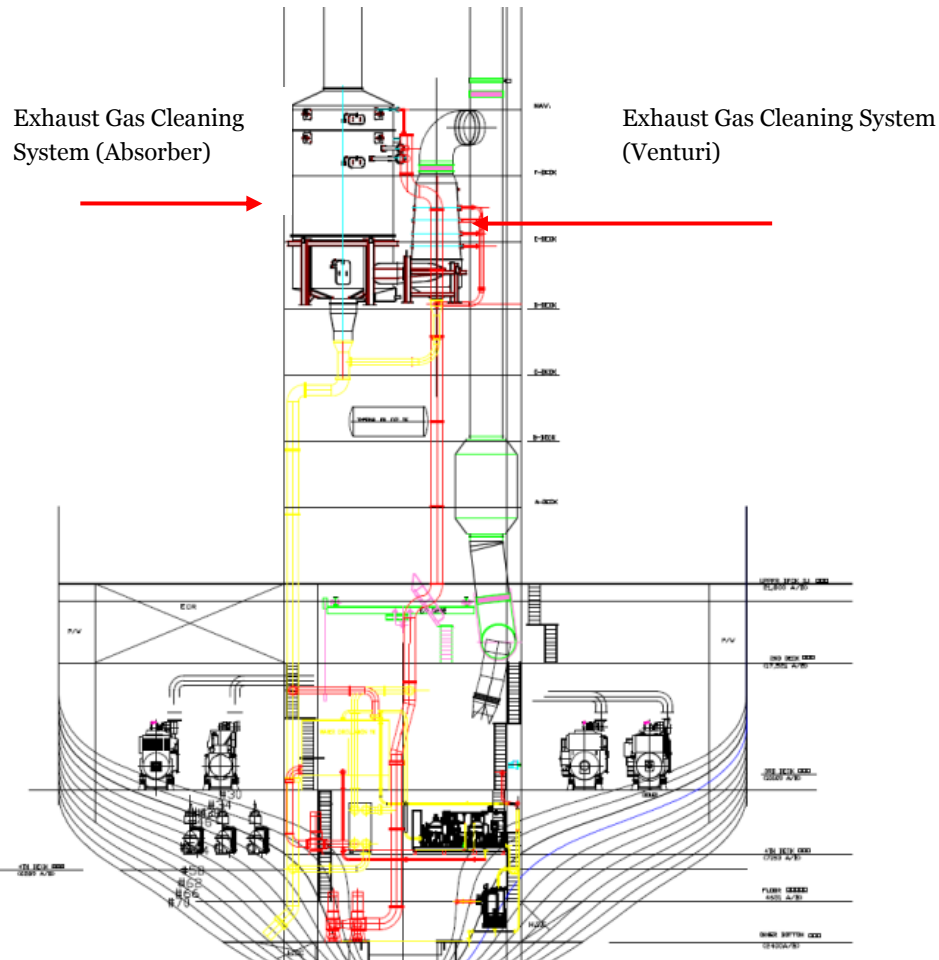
EGC scrubber arrangement shown in cross section seen from aft side.
